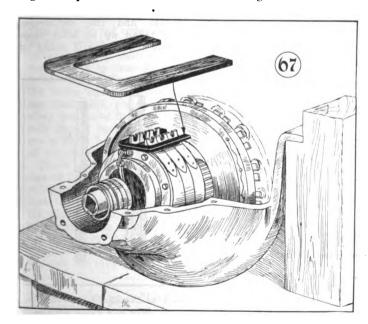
The lugs of the bands are held together with a U-shaped rod so that the pedal shafts will rest in the notches
